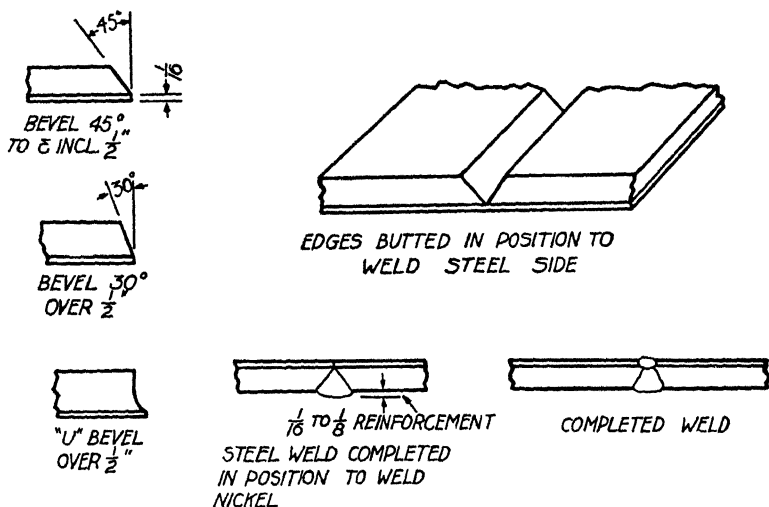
Butt welded joint, metallic arc welded.
